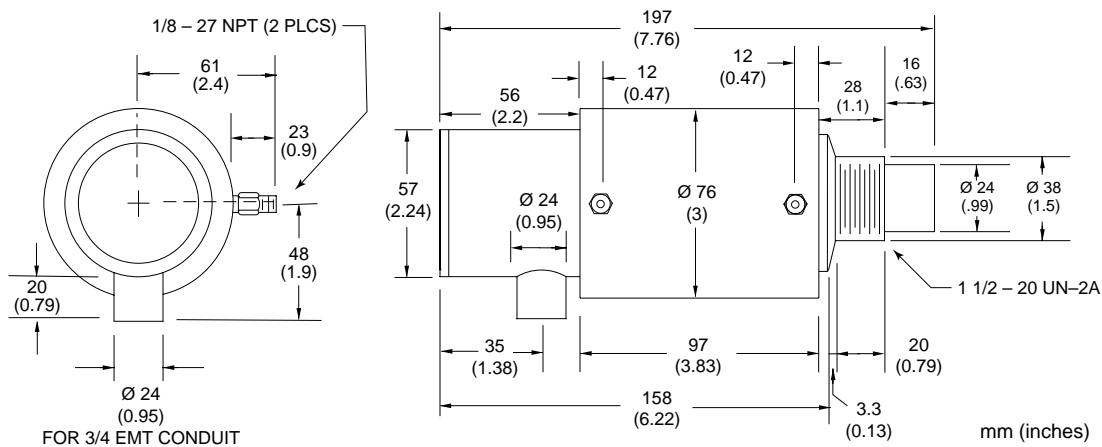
Sensing Head with Air/Water-Cooled Housing Option
